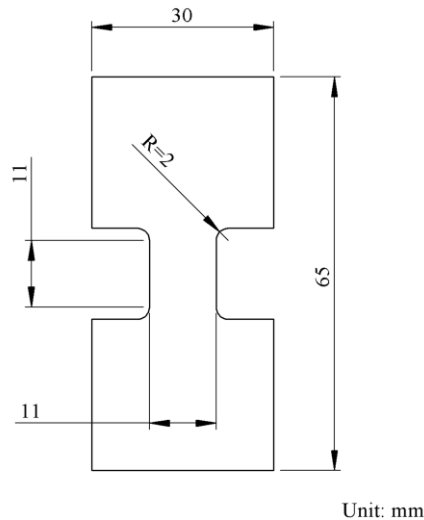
Geometry and dimensions of the modified dog-bone specimens.
